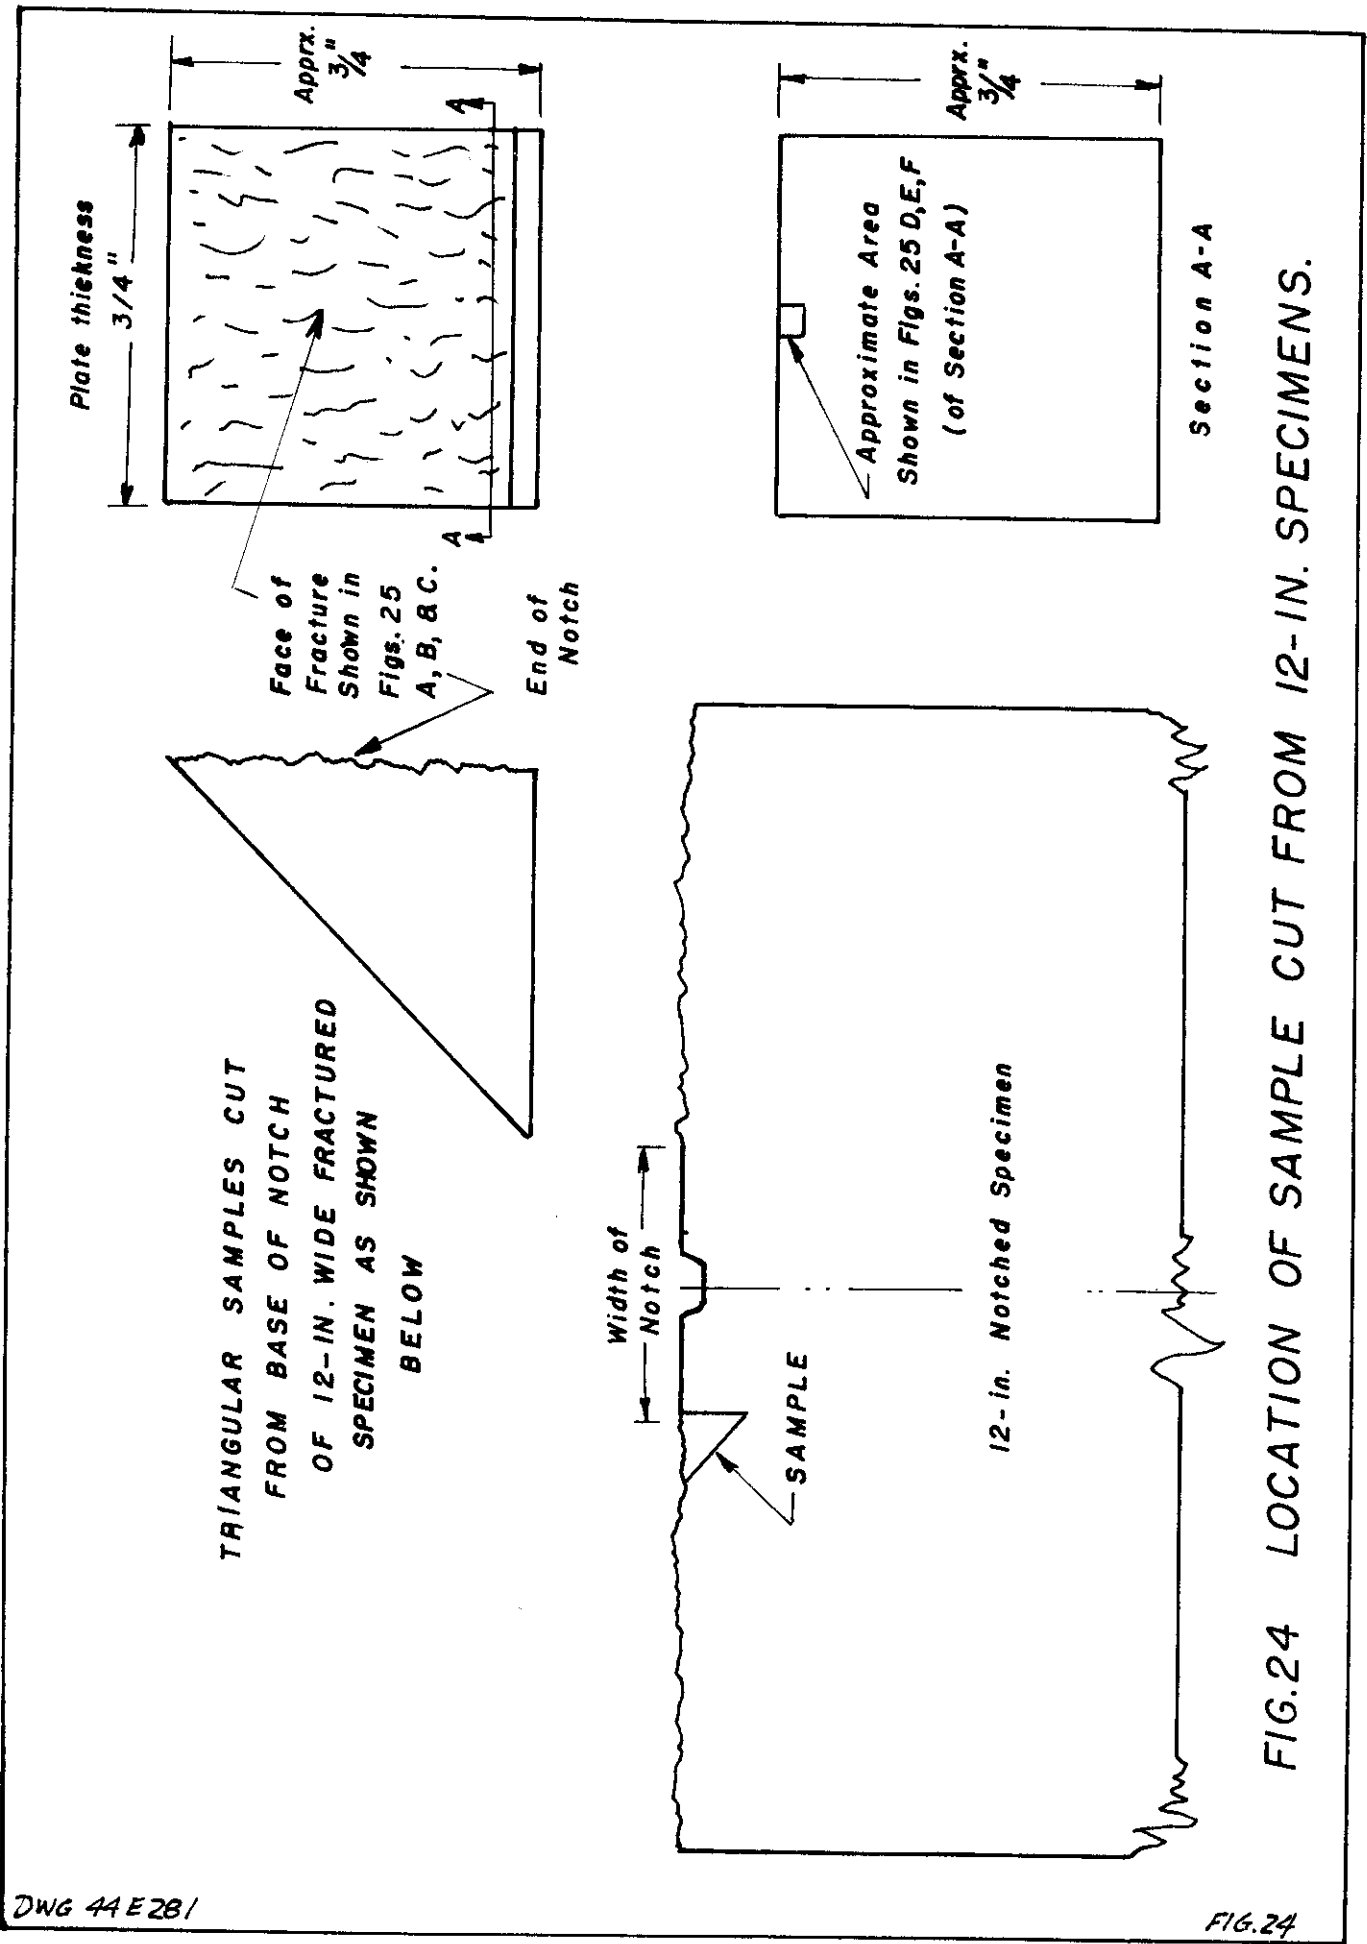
LOCATION OF SAMPLE CUT FROM 12-IN. SPECIMENS.
